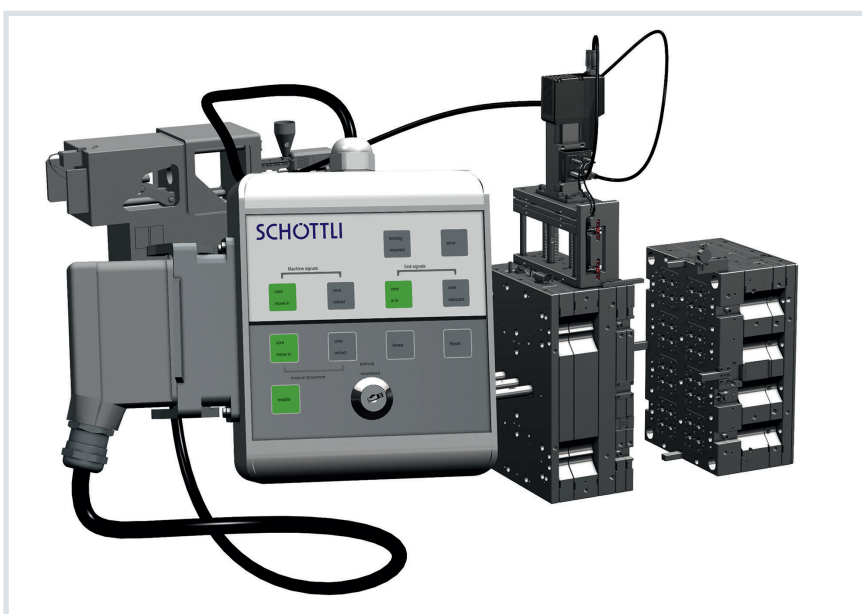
The E-Drive system is suitable for prototype molds and unscrewing molds up to 64 cavities © Schöttli/Husky
